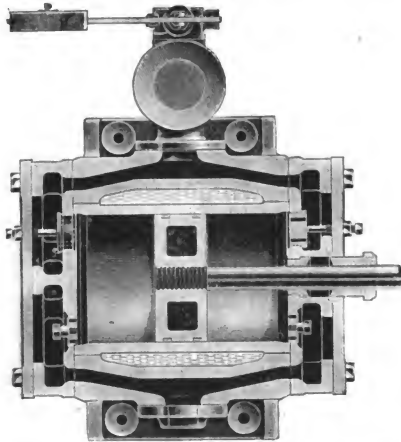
SECTION THROUGH CYLINDER OF AIR COMPRESSOR.
